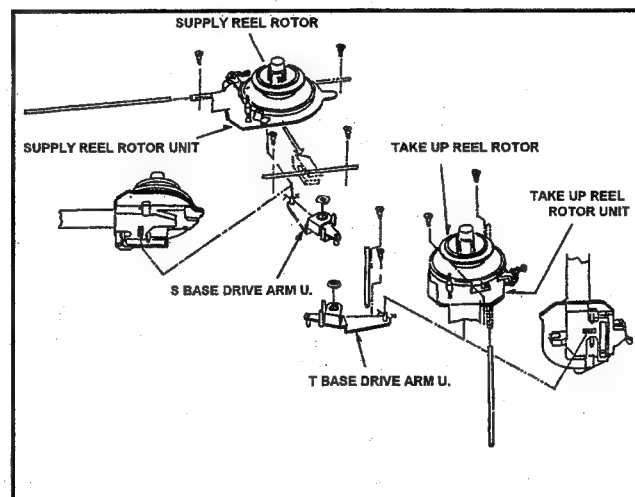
Installation of S & T Reel Rotor Unit
